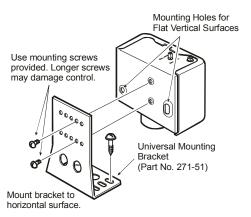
Mounting the P70, P72, and P170 Pressure Controls with NEMA 1 Enclosures, in. (mm)
